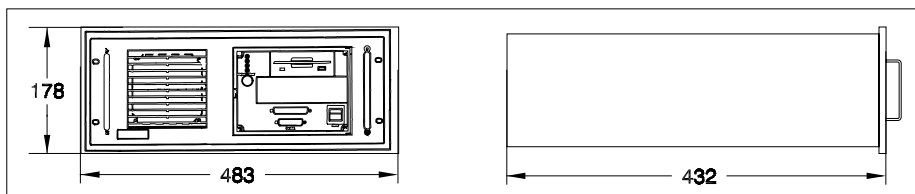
Dimensions of the PC central unit DPC 01 (design example)
